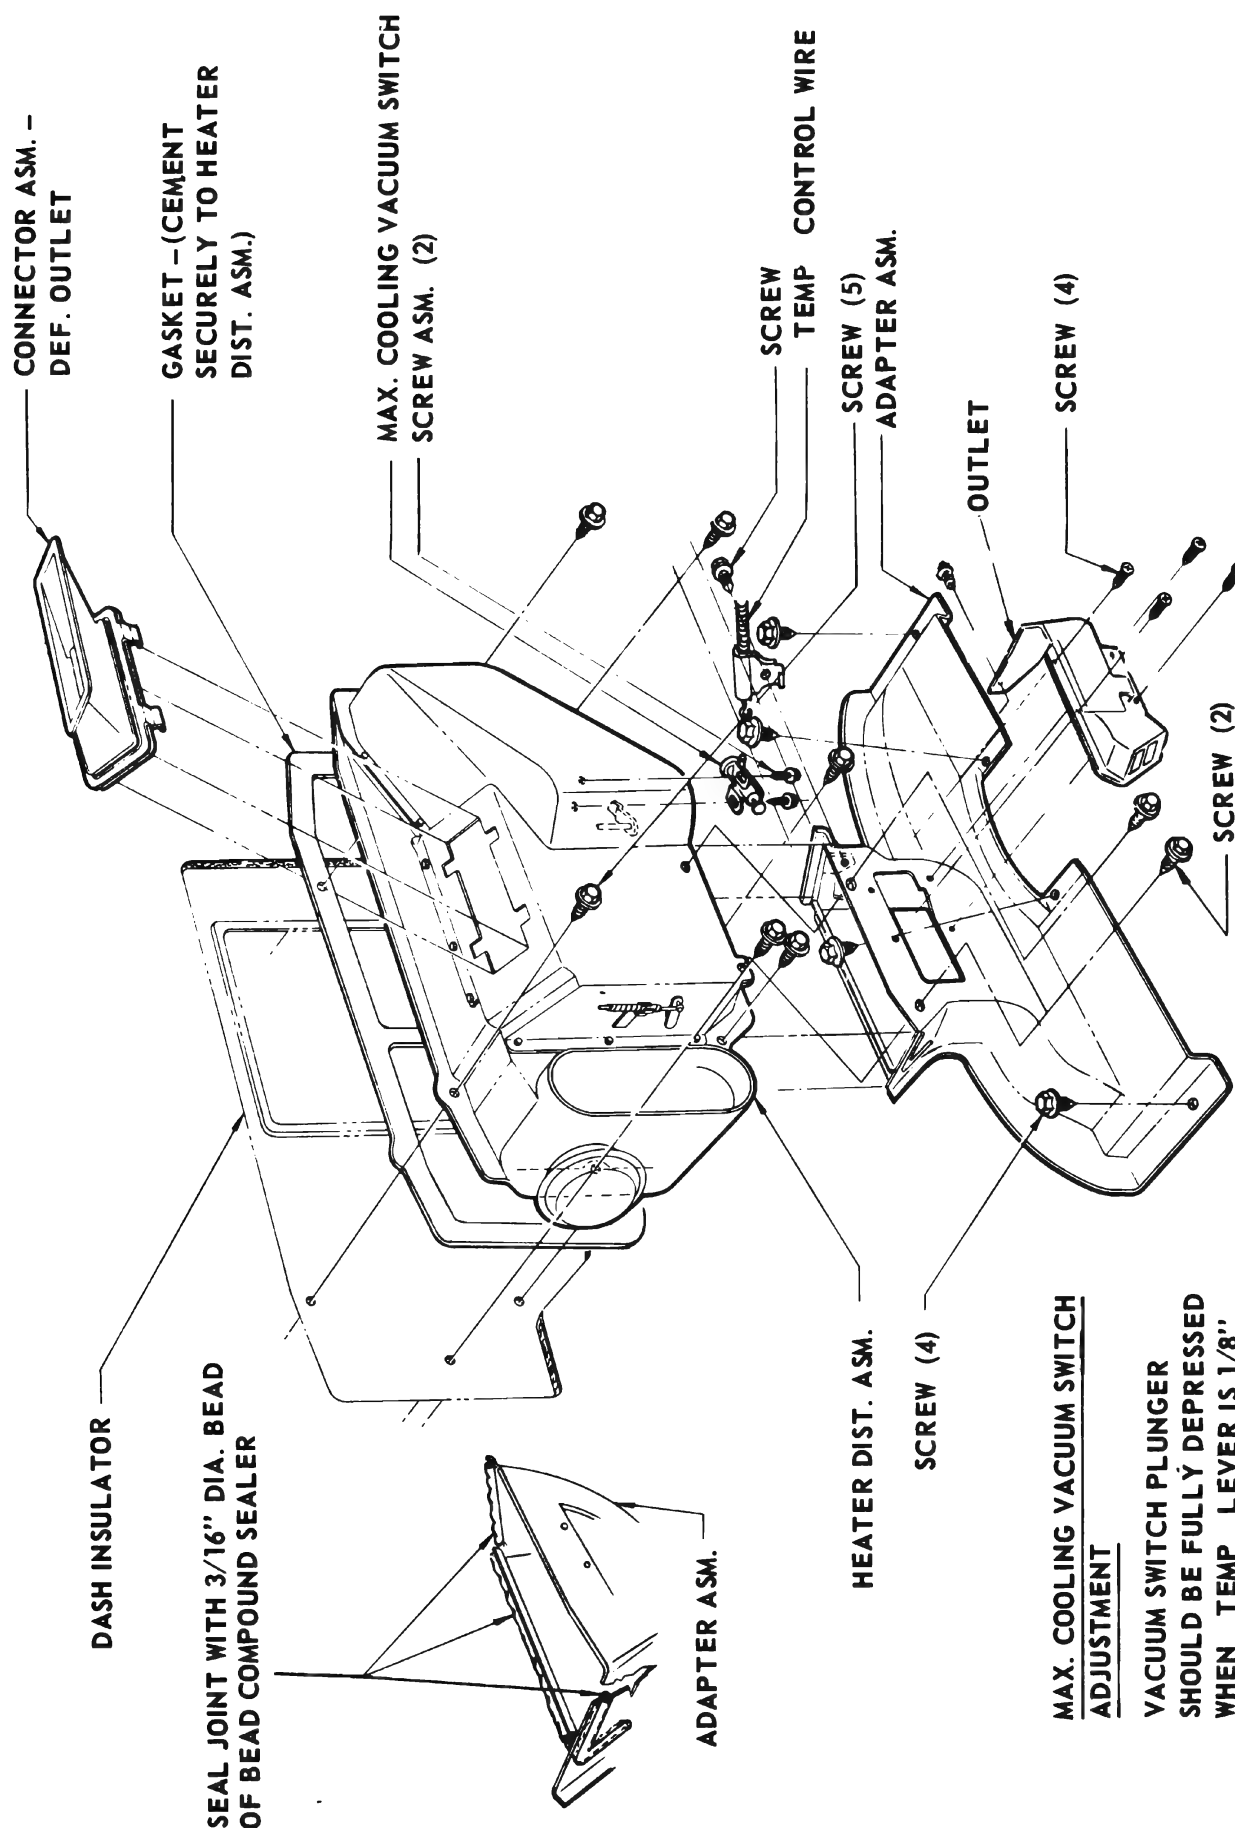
Heater Distributor Assembly, Adapter Assembly and Maximum Cooling Vacuum Switch Installation - 4400, 4600 and 4800 Series
